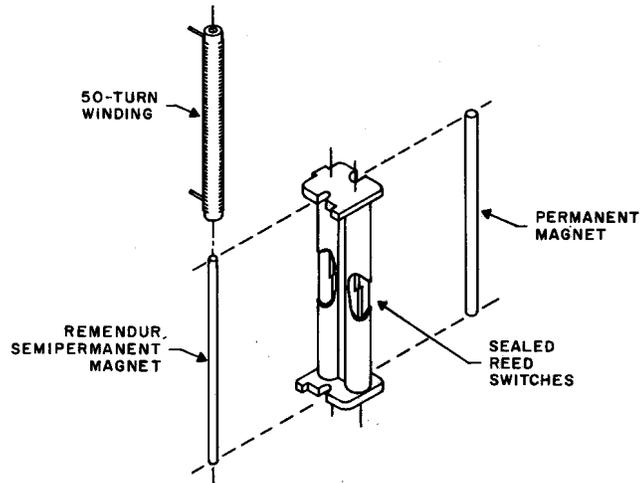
Exploded View of Bipolar Ferreed (4.03)
